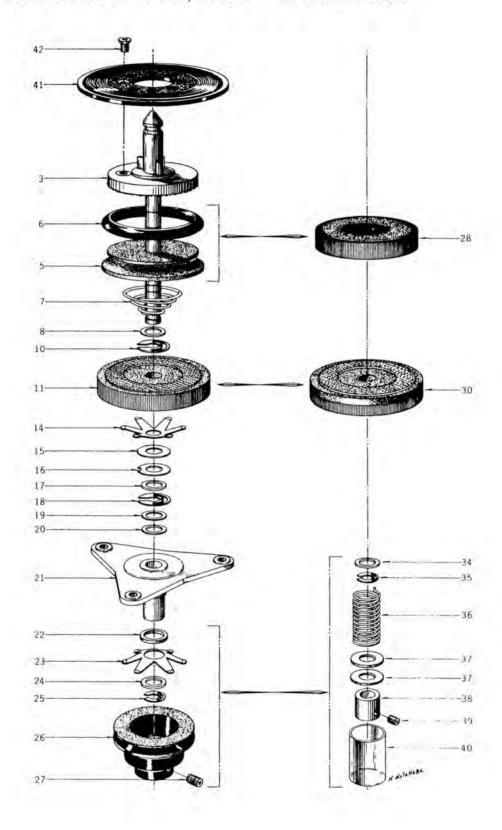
ILLUSTRATION OF HEAD BLOCK
